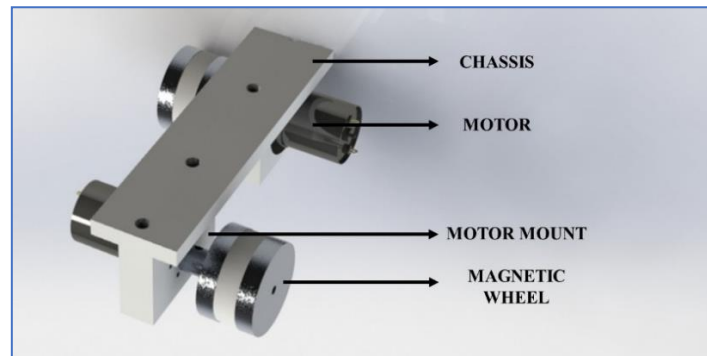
Design and key components of the cilampi out-pipe inspection robot
